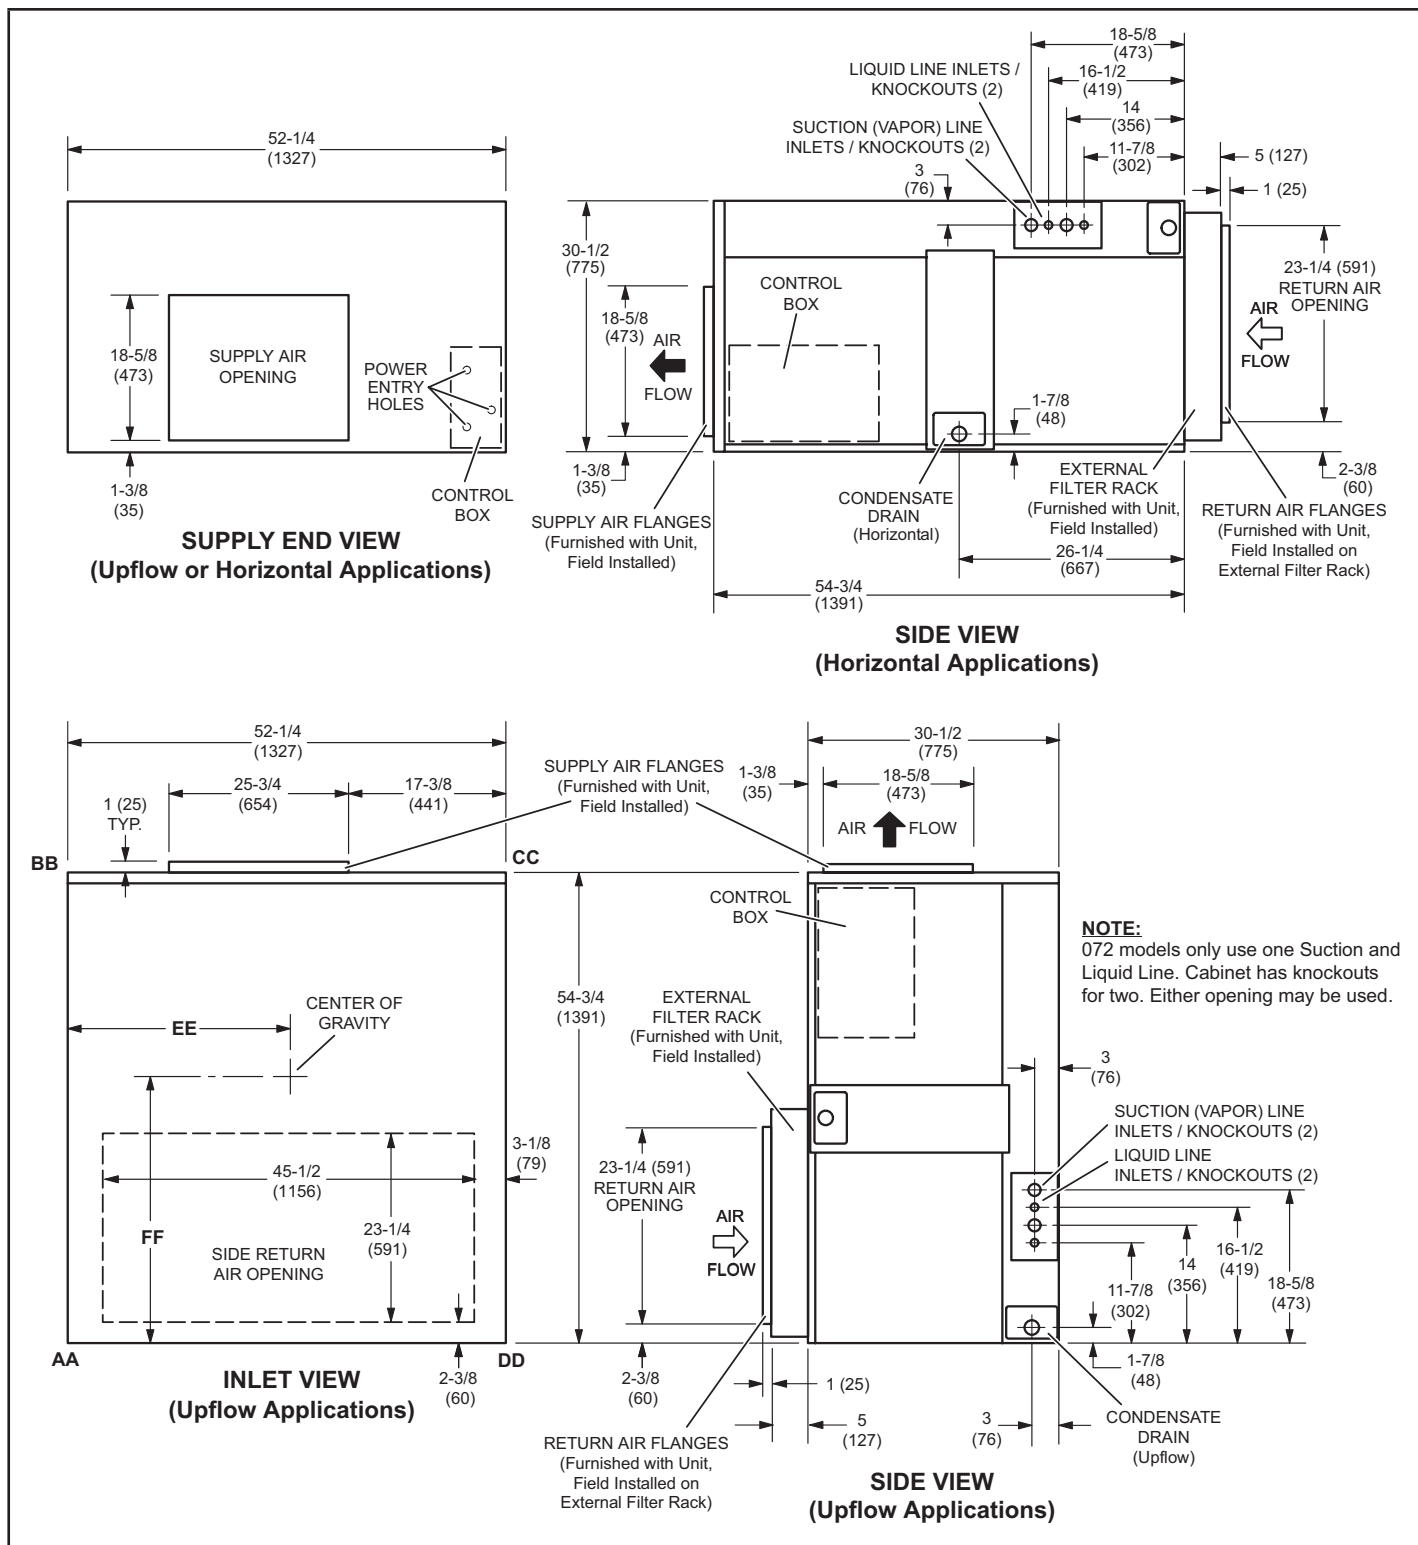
EL072-090KA Unit Dimensions – inches (mm)
